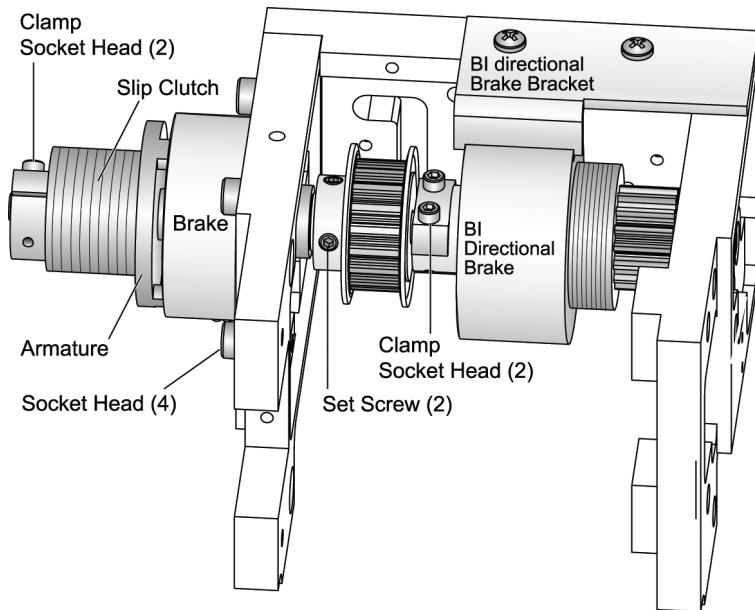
Slip Clutch, Brake/Armature and Bi-Directional Brake
